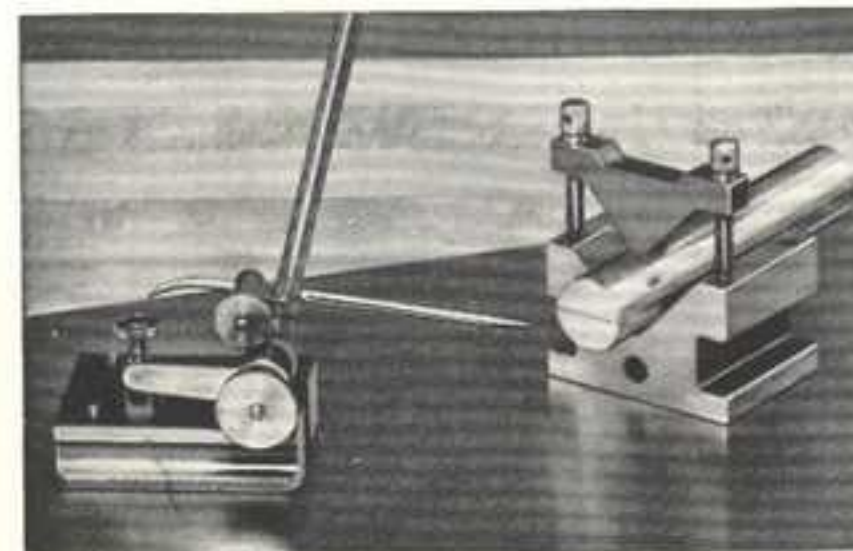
Laying Out Work with Surface Plate, V-Block, and Surface Gauge
